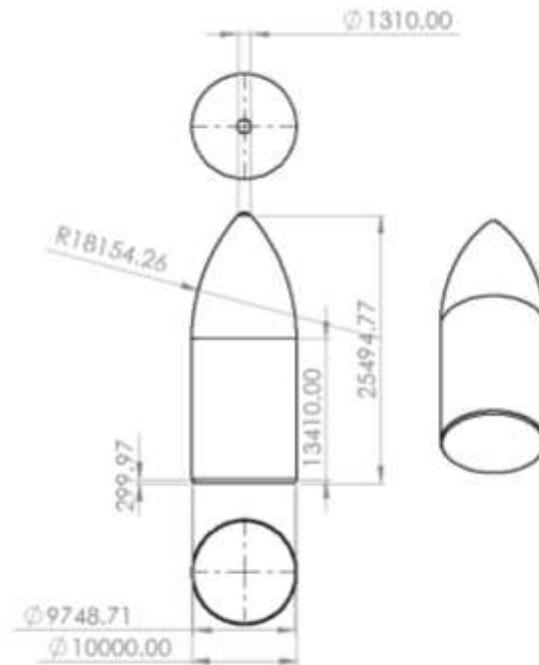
SLS Cargo Block 2, 2D drawing with dimensions
